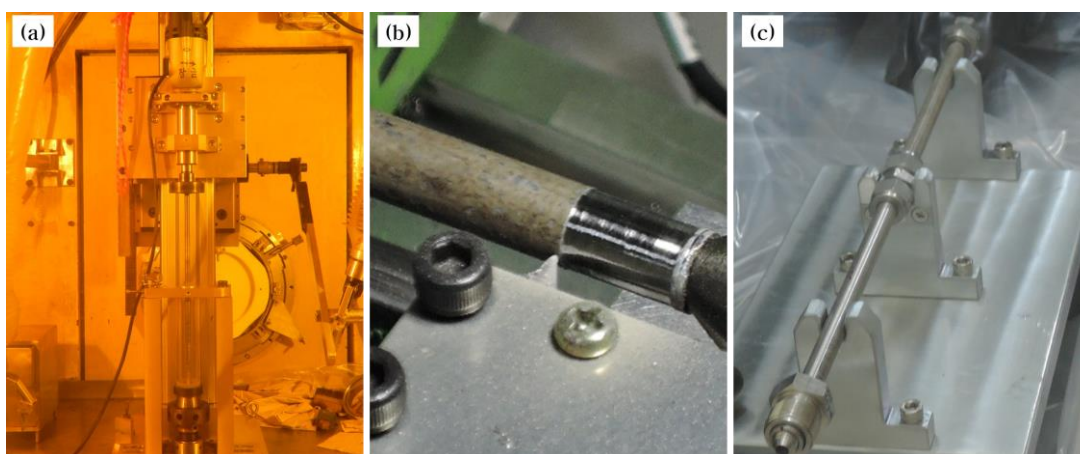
Test specimen preparation: (a) fuel removal, (b) oxide layer removal, (c) test specimen
